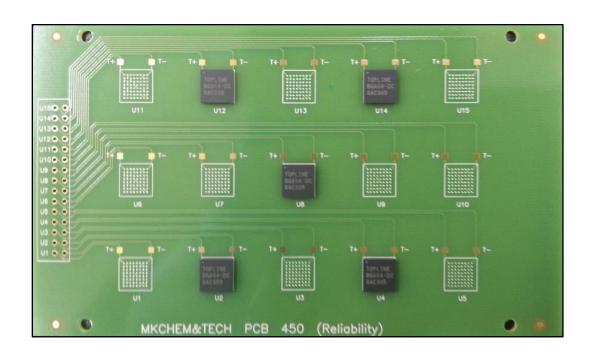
Photograph showing the BGA mounting configuration on the test PCB.
